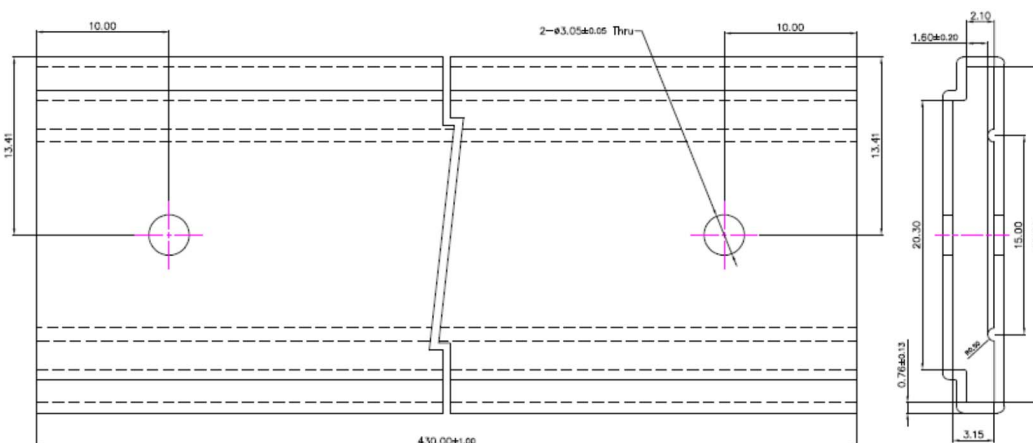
Package ray dimension for LUXEON CoB LHC1 – xxxx – 1204, -1205 and -1208.
